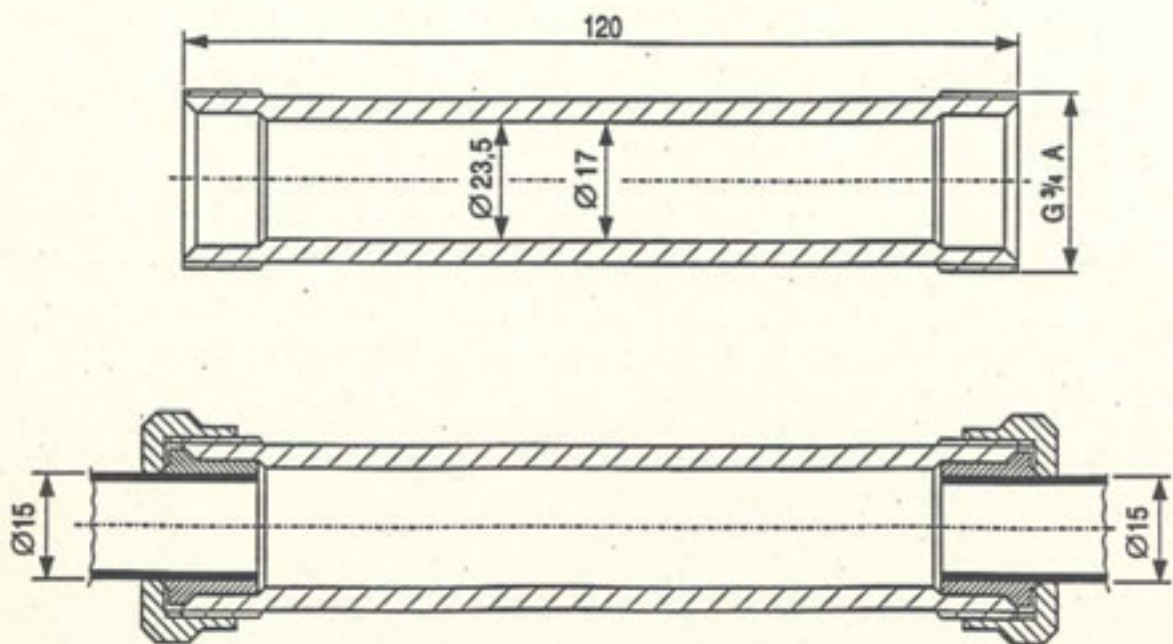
Test pieces for testing the materials for fittings.
